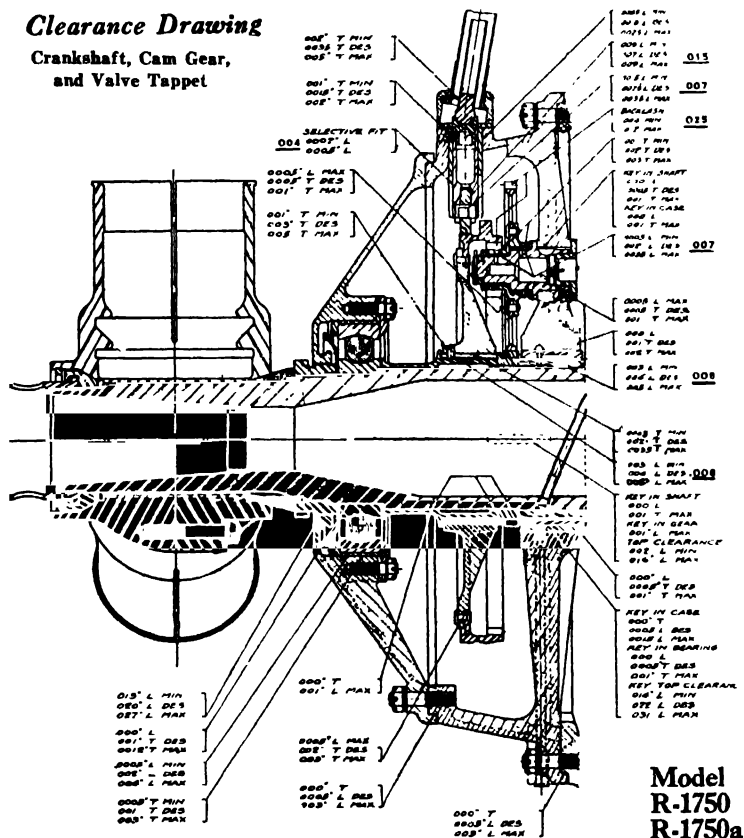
Clearance Drawing Showing Wright "Cyclone" Crankshaft, Camgear and Valve Tappet.
